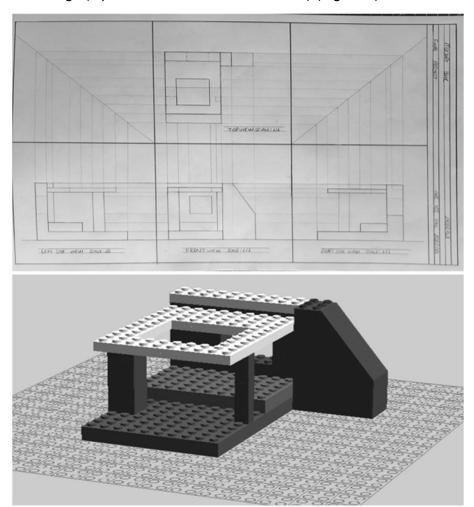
Orthographic drawings and 3D view of the composition of Mücahit Özer
